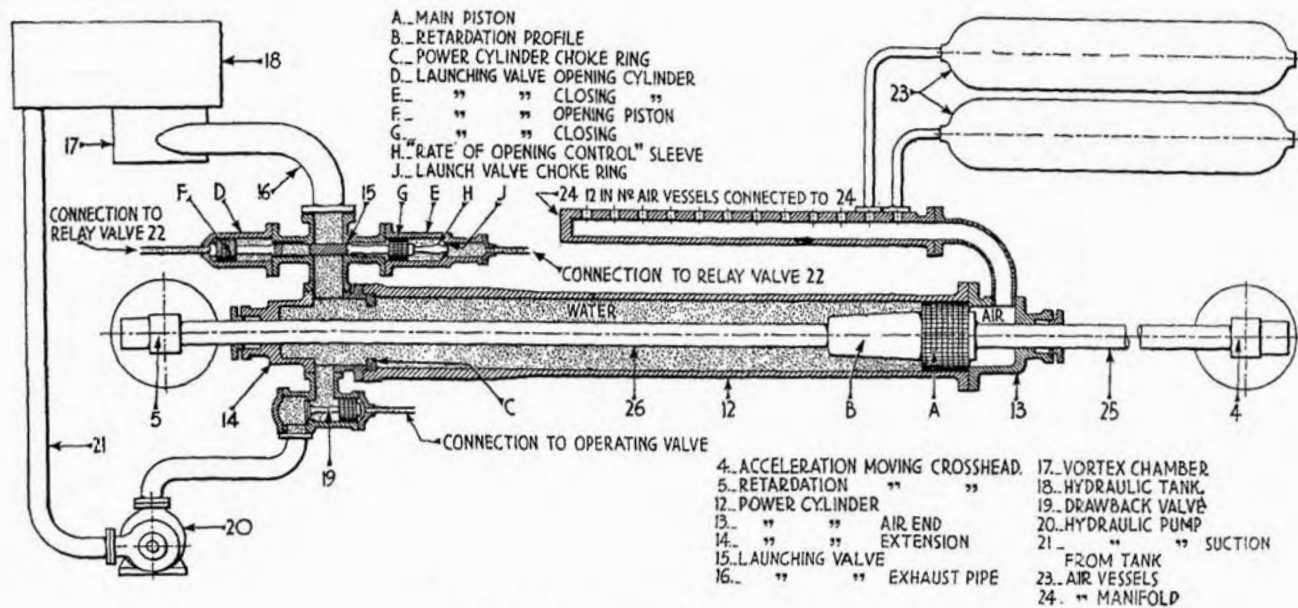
DIAGRAM OF ACCELERATOR MACHINERY
